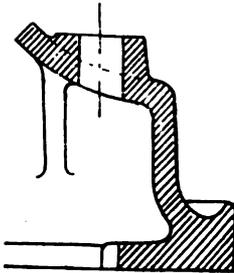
Boss for Foundation Bolt, with Stiffening Web.
